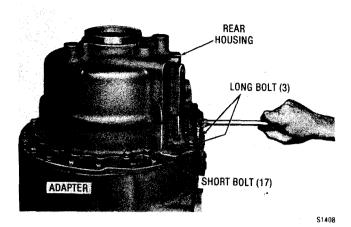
Removing rear housing bolts (TRT 2221-1, 2421-1)
